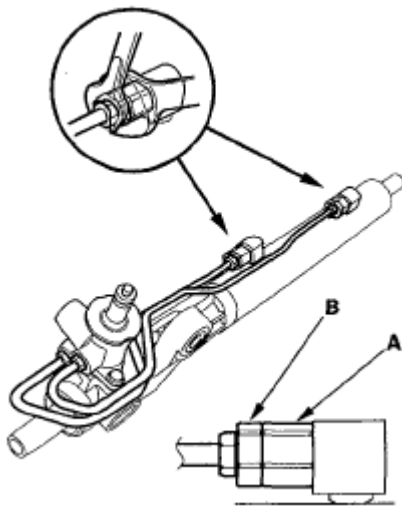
Identifying Cylinder Lines From Steering Gearbox
